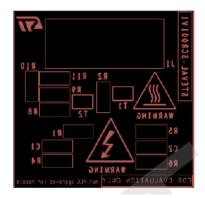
STEVAL-SCR001V1 board layout and silk-screen (bottom side)
